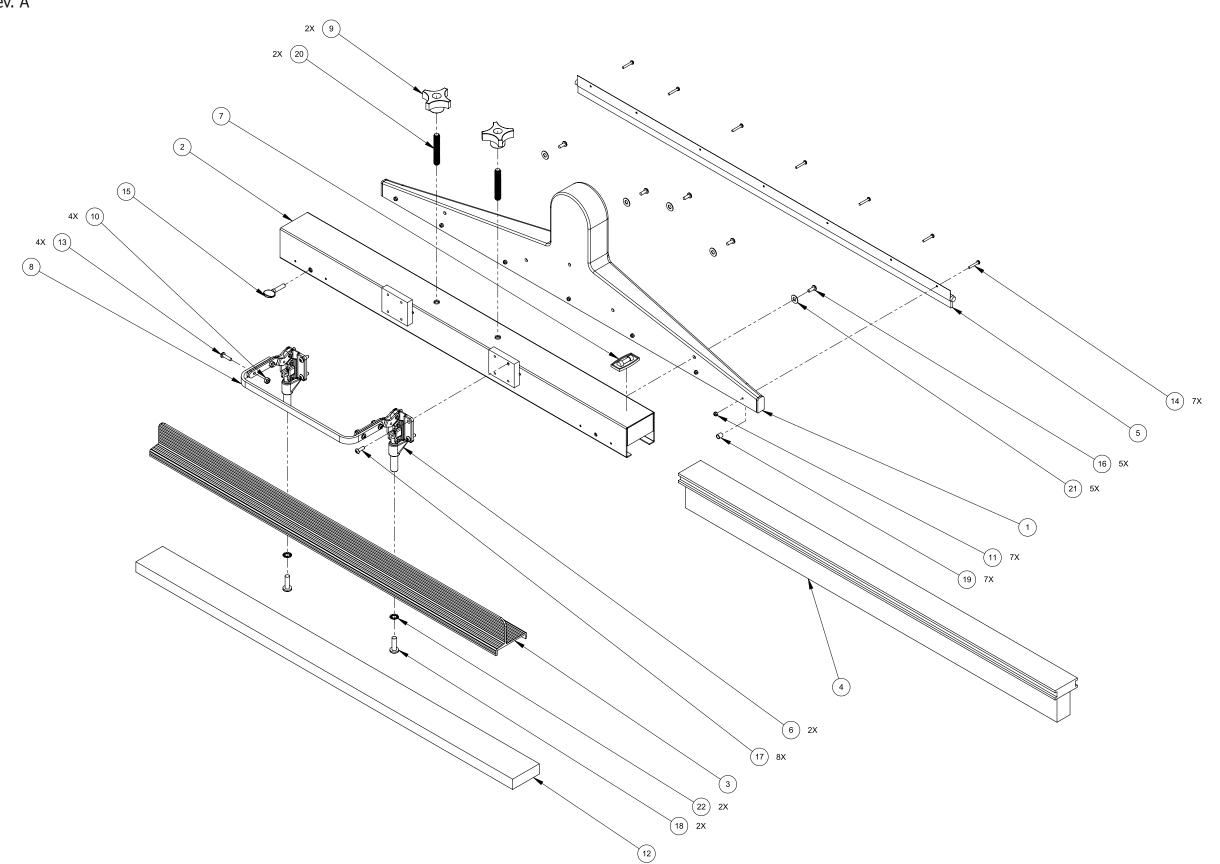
37" Nylon Grit Head Assembly 190-100-015 Rev. A
